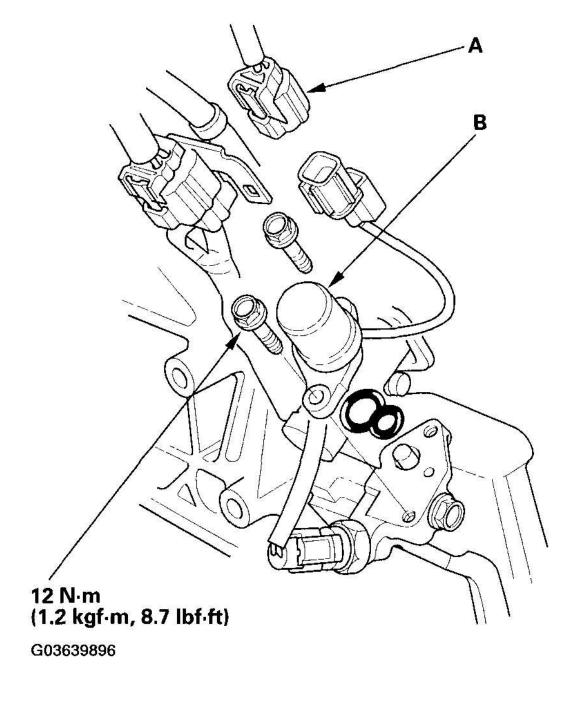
Removing Rocker Arm Oil Control Solenoid (VTEC Solenoid Valve) 1P Connector Courtesy of AMERICAN HONDA MOTOR CO., INC.
